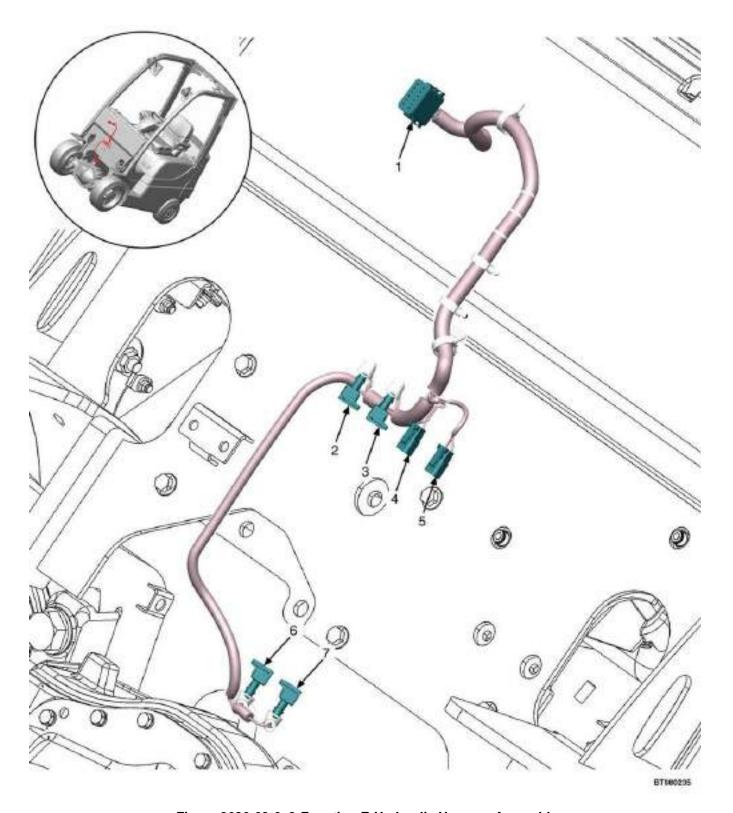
3-Function E-Hydraulic Harness Assembly
